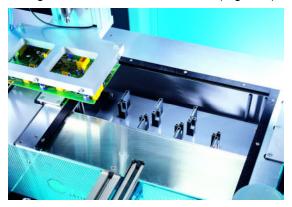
Stamp soldering process is carried out in nitrogen atmosphere to ensure consistent solder joint formation
